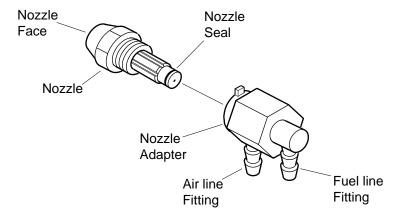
Nozzle and Nozzle Adapter, 30,000 BTU/Hr Model
